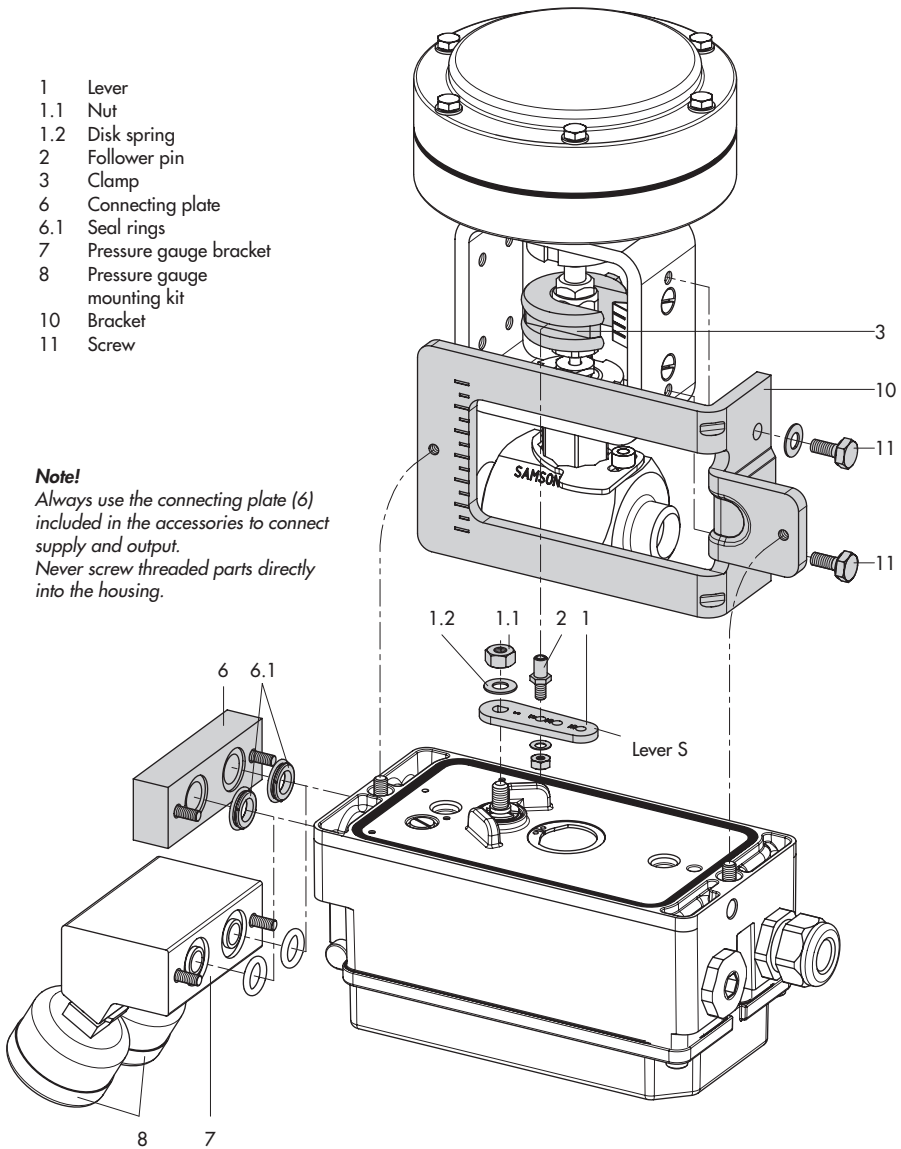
· Attachment to Type 3510 Micro-flow Valve
